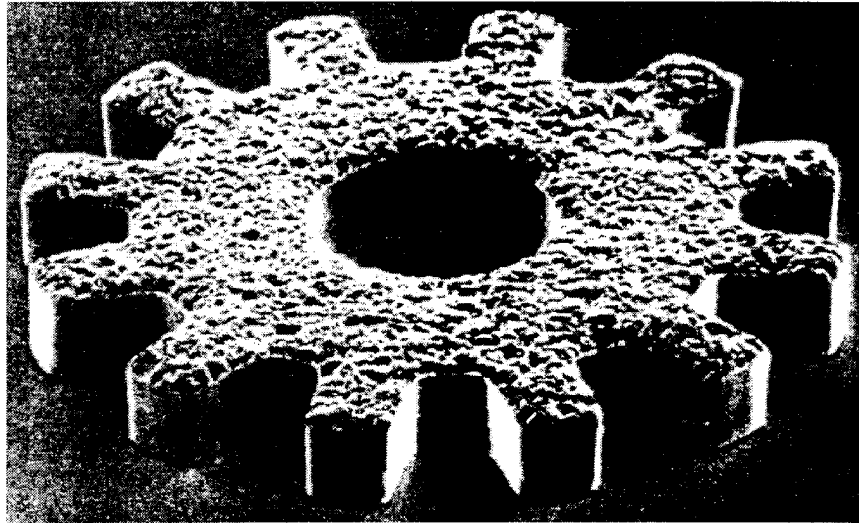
Copper gear made in a deep UV exposure and wet electroplating process; the gear is 300 μm in diameter and 45 μm thick [17].
